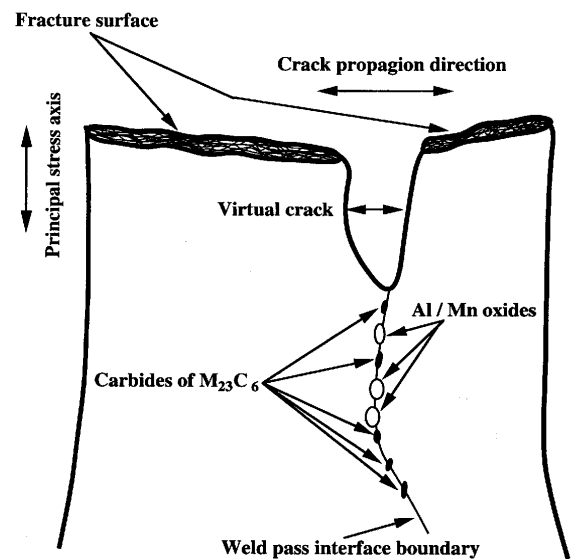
Illustration of cross section view of SUS316L weld metals tested at 293K, 77K and 4K.
